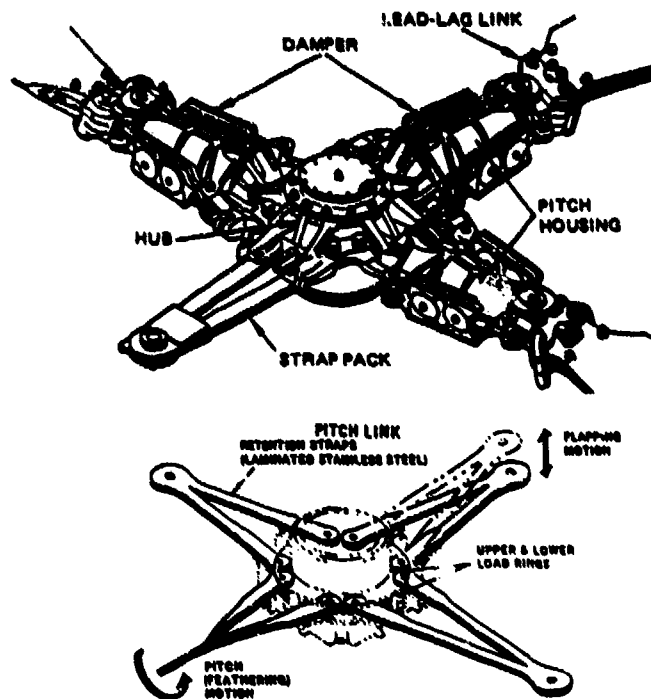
ROTOR HEAD OF HUGHES AH-64
